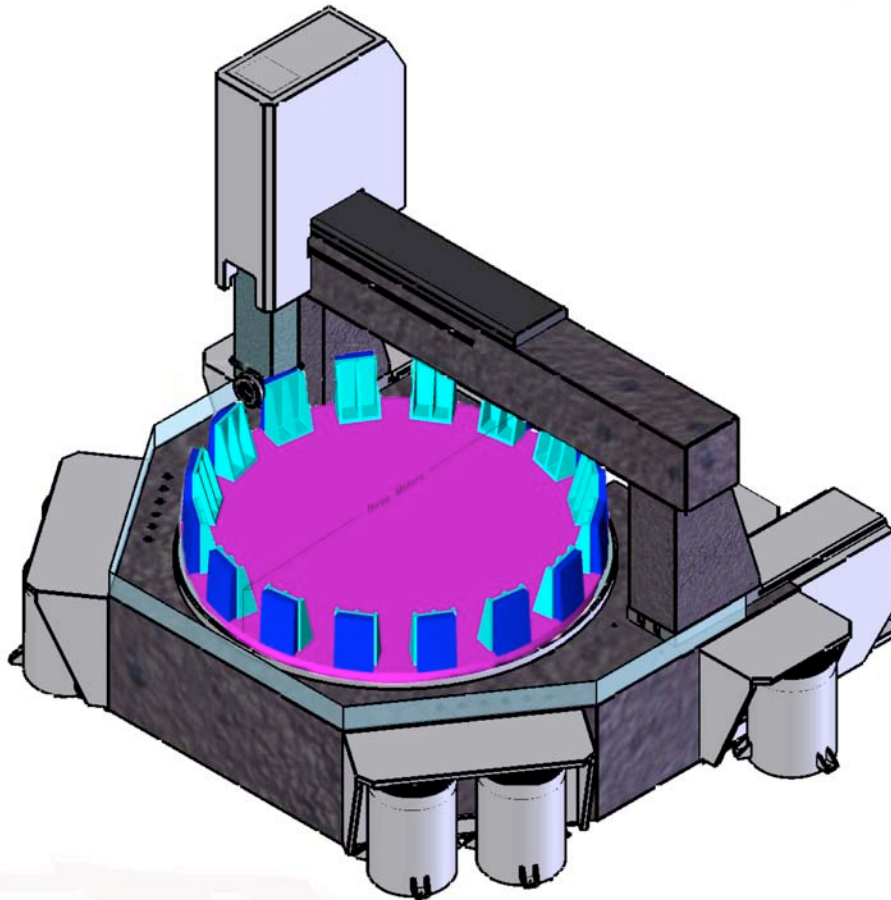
Concept drawing of DOS/Moore Tool Co. 3 meter capacity diamond turning machine with 16 super alloy slumping mandrels utilizing the 20,000 lb. load capacity air bearing spindle.
